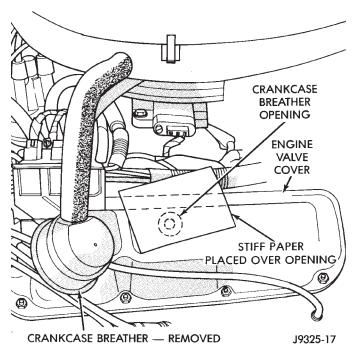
Check Vacuum at Crankcase Breather Opening—Typical
